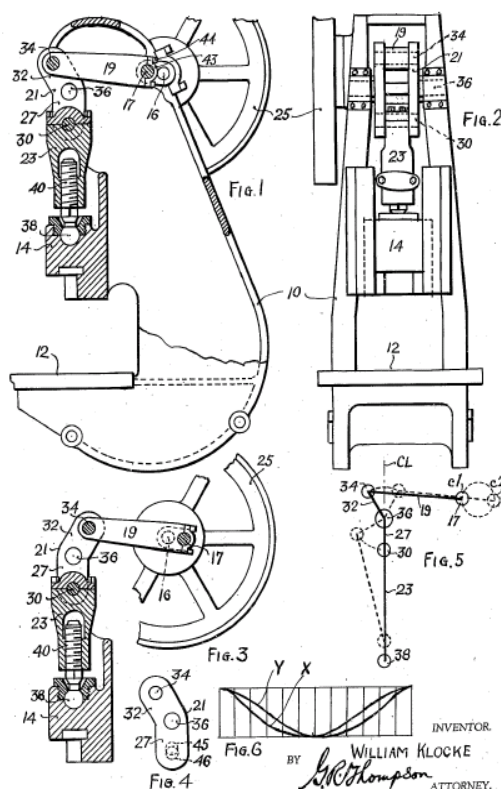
Mechanical crank press with a composed mechanism (bar mechanism + crank mechanism) designed to modify the motion law of the slide. Solution proposed by patent US 2491317 [2]
